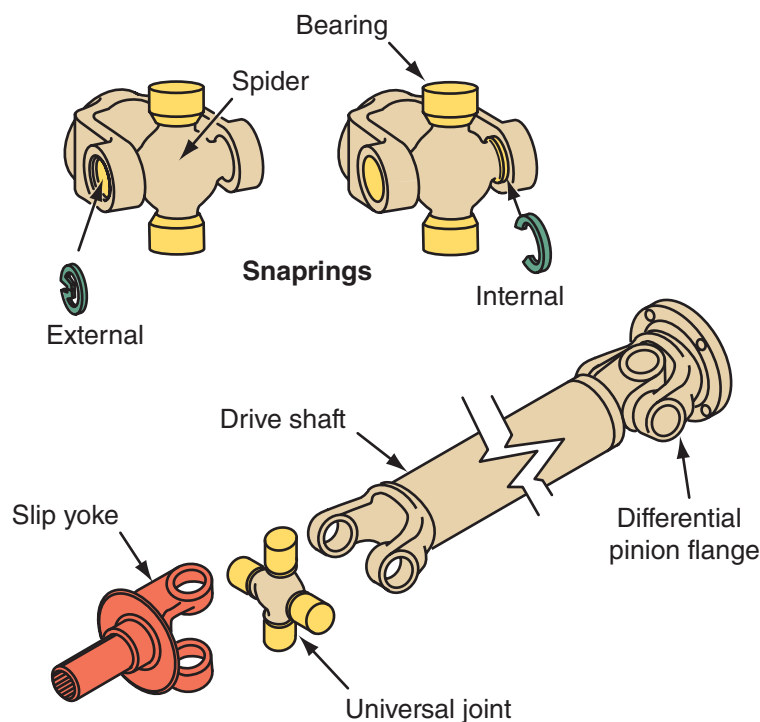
A drive shaft assembly with exploded U-joints.
